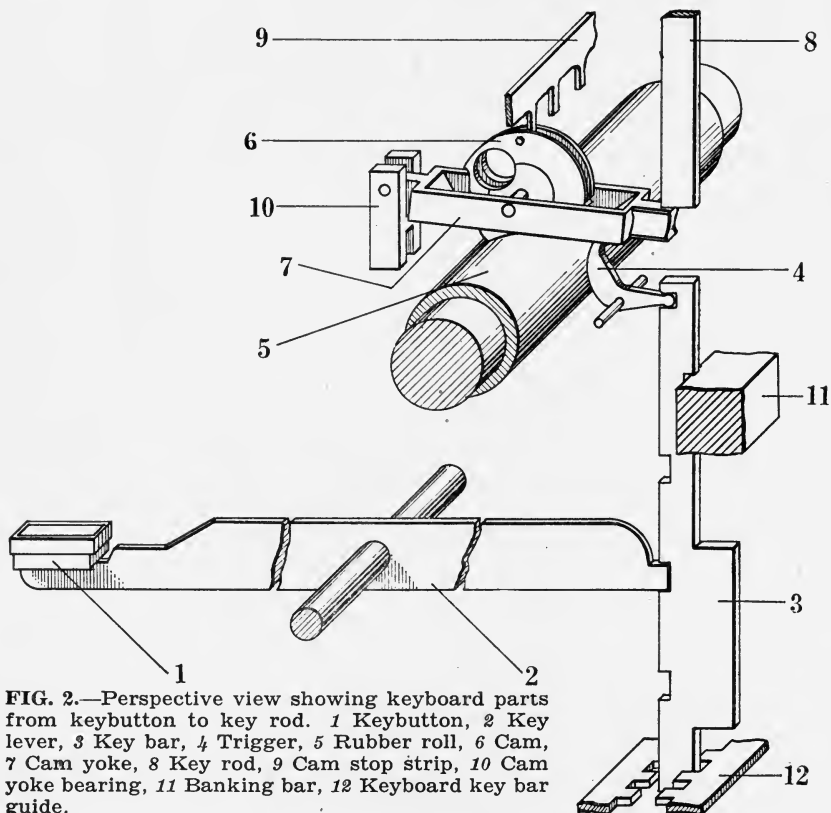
Perspective view showing keyboard parts from keybutton to key rod. *1* Keybutton, *2* Key lever, *3* Key bar, *4* Trigger, *5* Rubber roll, *6* Cam, *7* Cam yoke, *8* Key rod, *9* Cam stop strip, *10* Cam yoke bearing, *11* Banking bar, *12* Keyboard key bar guide.
